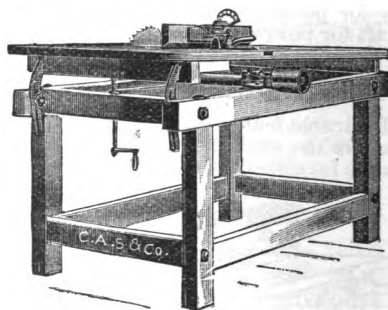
IMPROVED SLITTING SAW TABLE.
